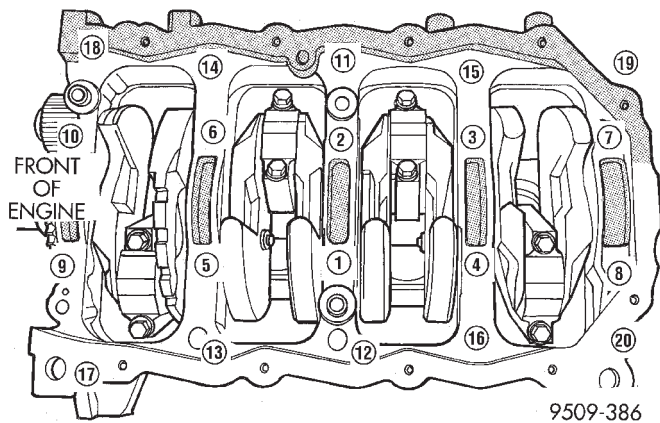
Main Bearing Caps/Bedplate Torque Sequence
